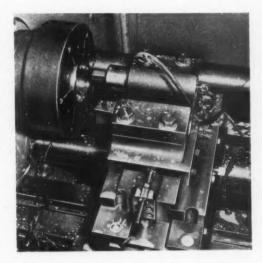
Set-up for Machining the Ball Track in an Outer Race on a Fay Automatic, Using a Negative Rake Carbide-tipped Form Tool
